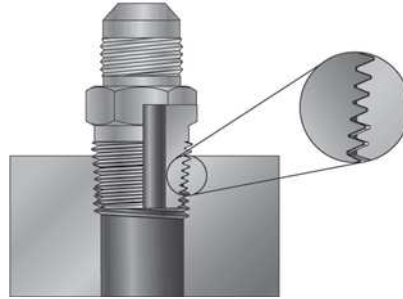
Tapered Thread Port. Source: Assembly/Installation section of [64].
